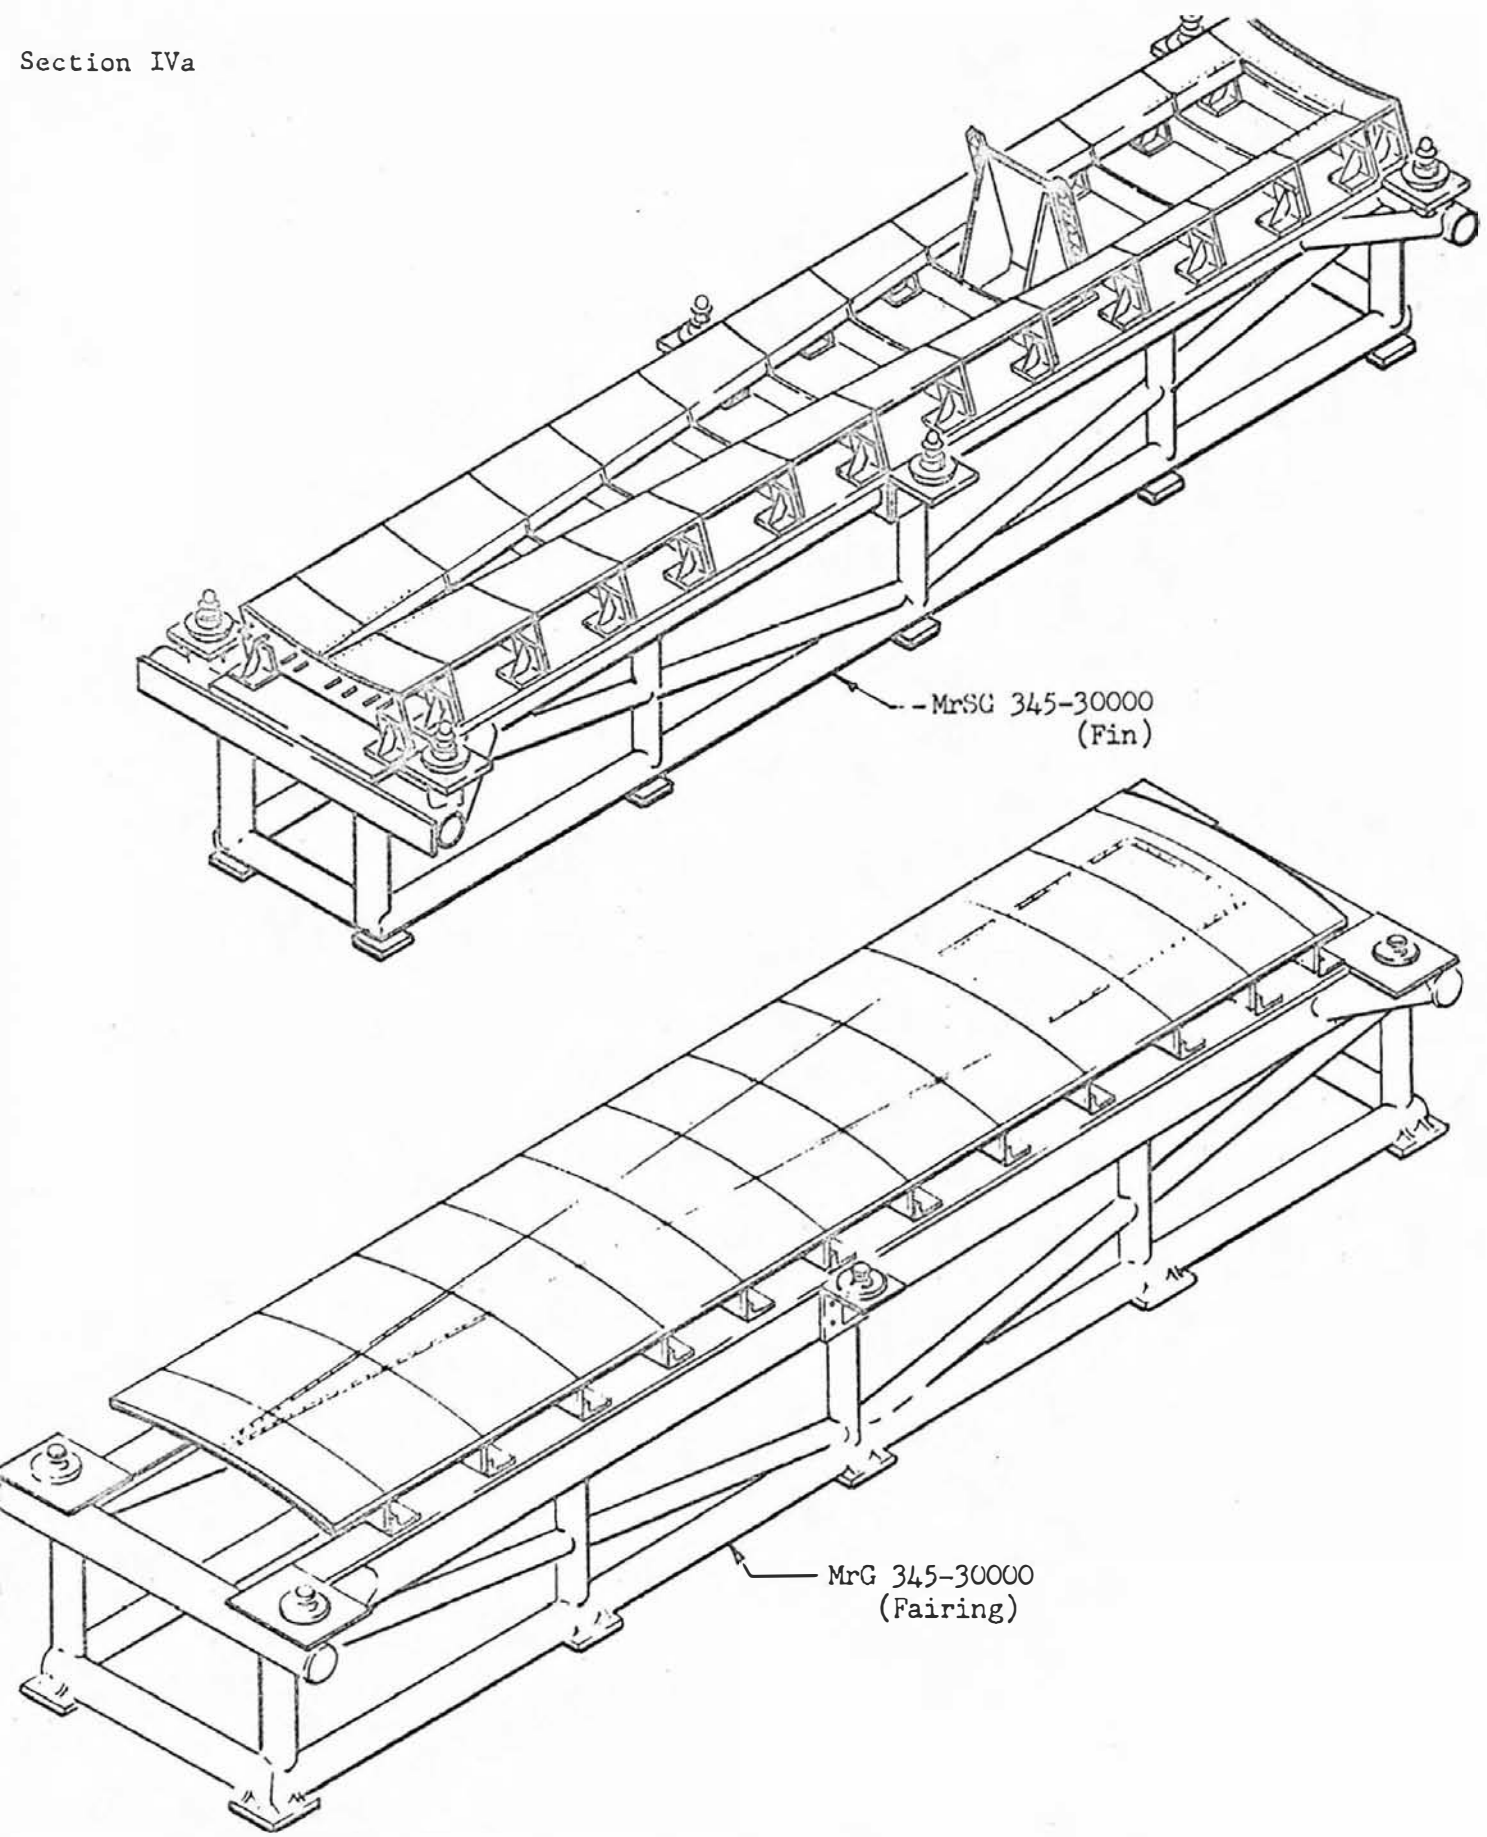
24. Master Setting Gage MrSG-345-30000 and Master Gage MrG-345-30000
